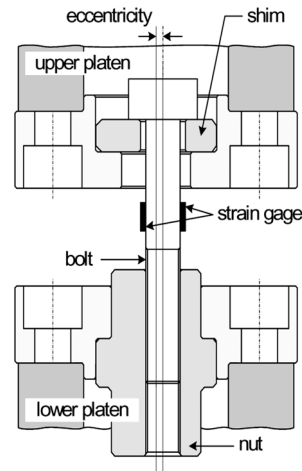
Grip to apply eccentric load to bolt, and strain gages to measure bolt axial strain
